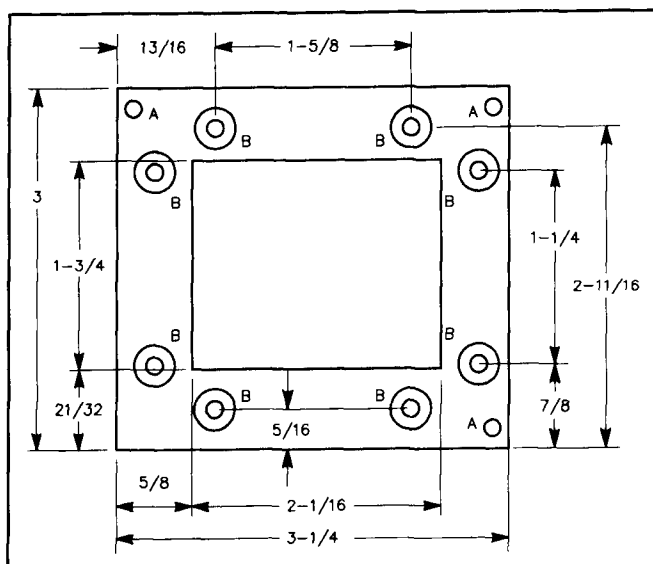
Air inlet retaining plate is made from 3/16-1/4 in. aluminum. Hard alloys, such as 6061-T6 or 2024-T6 are preferred. Holes marked A are No. 7, tapped 1/4-20. Use the blower itself as a template to locate the holes. Holes marked B are No. 25, countersunk for 6-32 flathead screws. Use the top cover to locate these holes.
